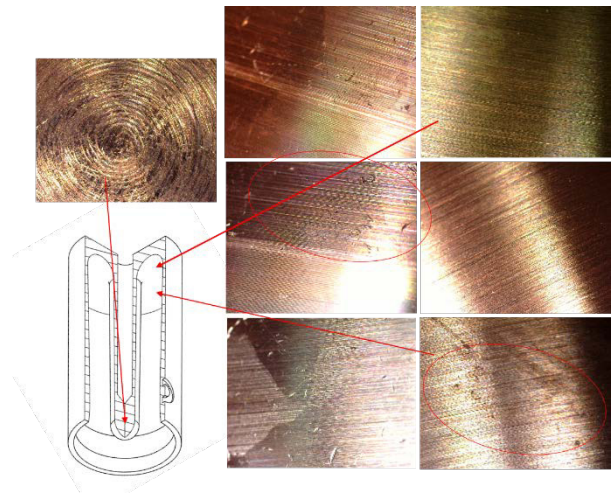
Optical inspection of the copper bulk cavity prototype surface at different positions after machining.
